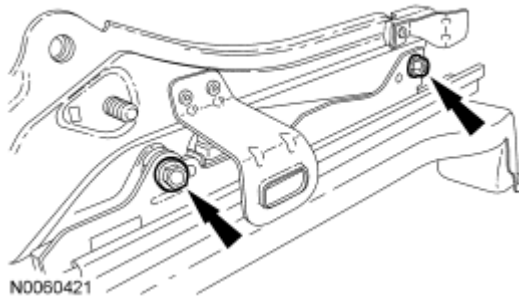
Identifying OCS Weight Sensor Bolt Nuts
